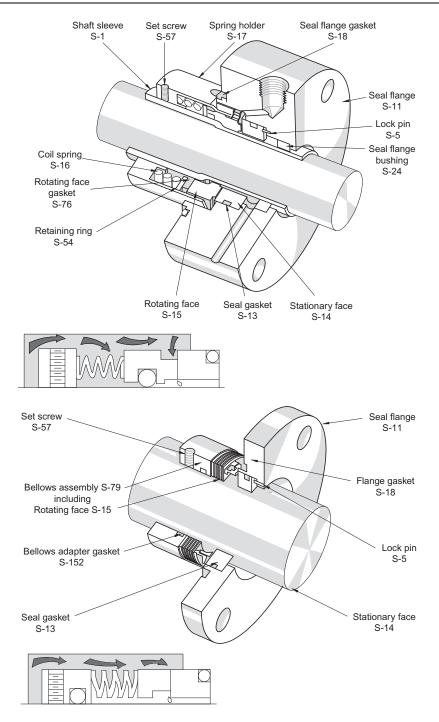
Cont'd (B) (1 of 2): "Spring Pusher" type mechanical seal assembly used for low to moderate temperatures; (2 of 2) "Bellows" type used for high temperatures.
